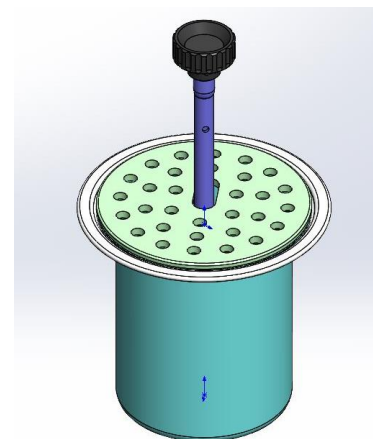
3D Model of the Floor Drain Trap/Scupper Valve
